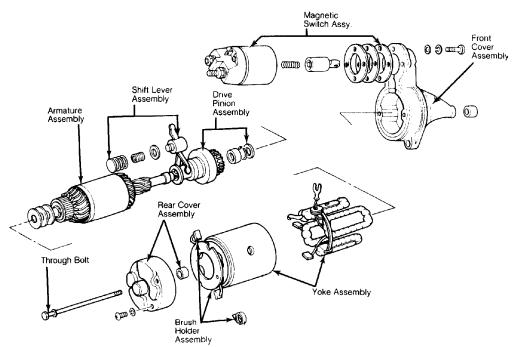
Disassembled View of Typical Mitsubishi Conventional
